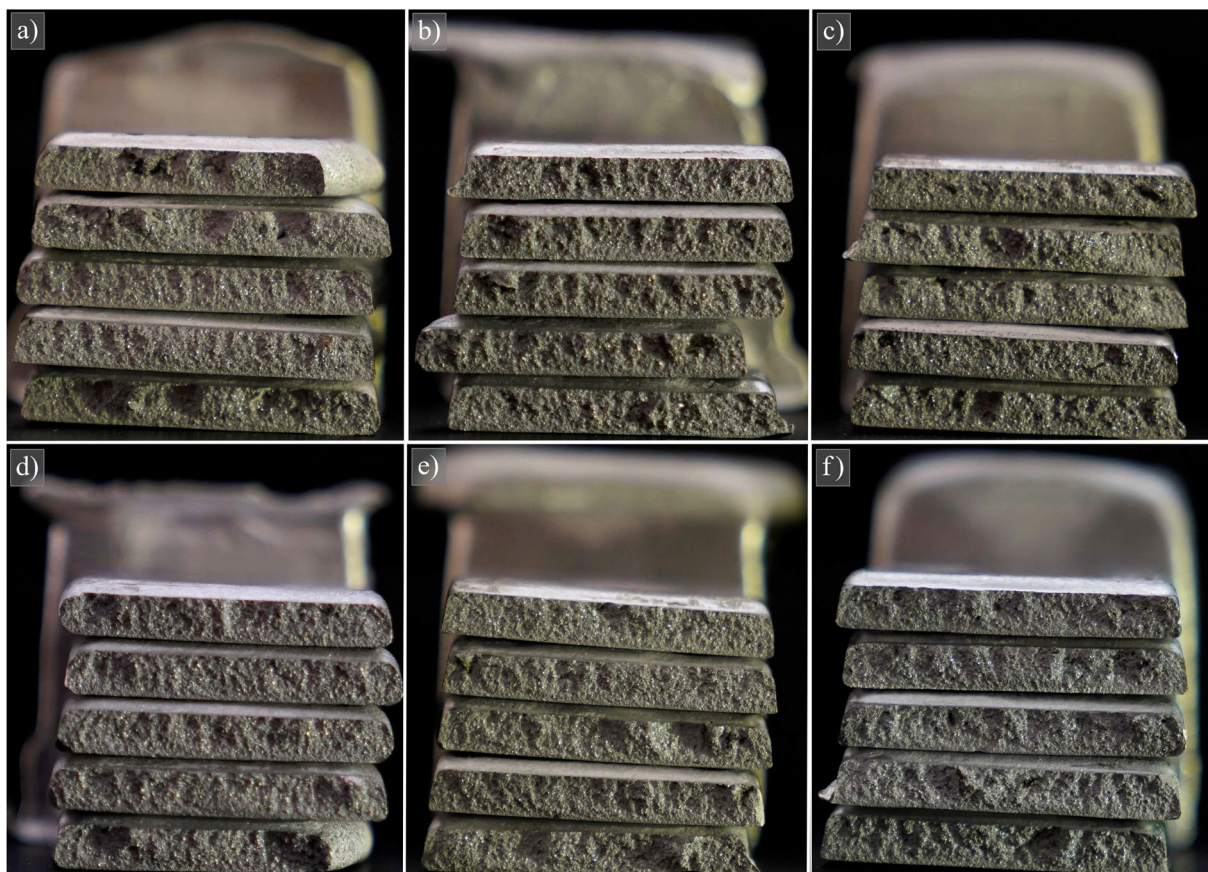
Fracture surface images of K-mold samples; a) WD5, b) WD10, c) WD15, d) D5, e) D10, and f) D15
